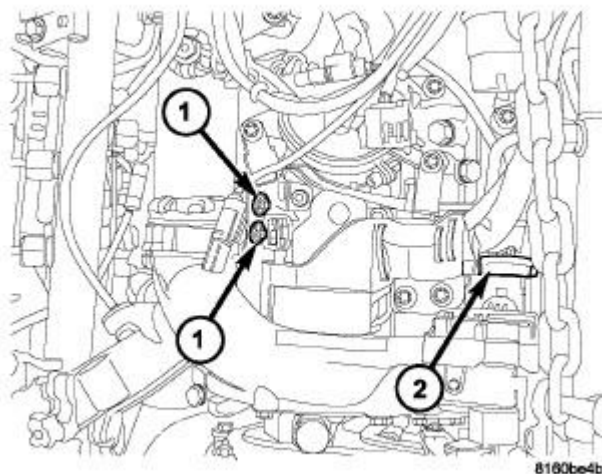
REMOVING/INSTALLING TURBO, SHIELDS, EXHAUST SYSTEM & SUPPORT BRACKET COMPONENTS
